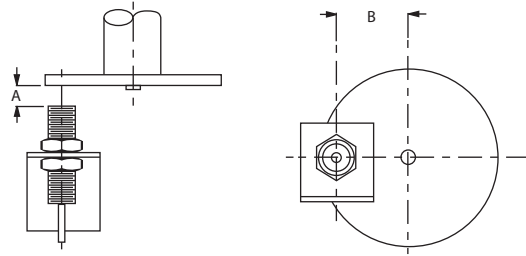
Standard 906 Sensor with 255 Pulser Disc
